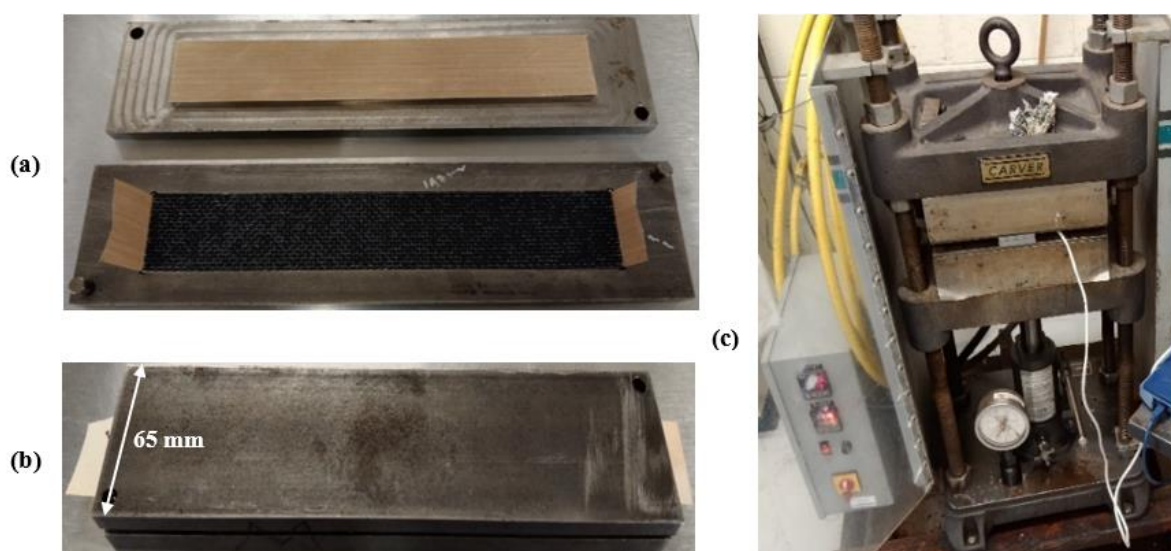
(a) Stacking of layers in the mold, (b) Closing of the mold prior to thermoforming of coupon and (c) Carver® 4122 Manual Heated Press.
